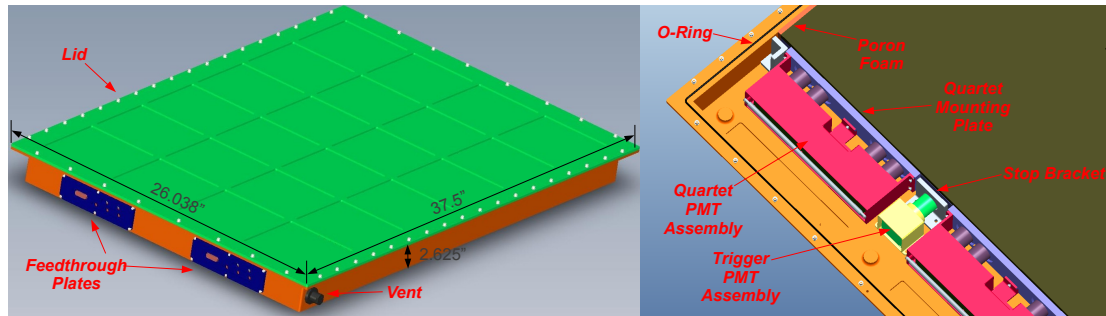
Left: a CAD drawing of the BSD detector enclosure. Right: one corner of the BSD detector box showing a quartet PMT assembly and a trigger PMT assembly.
